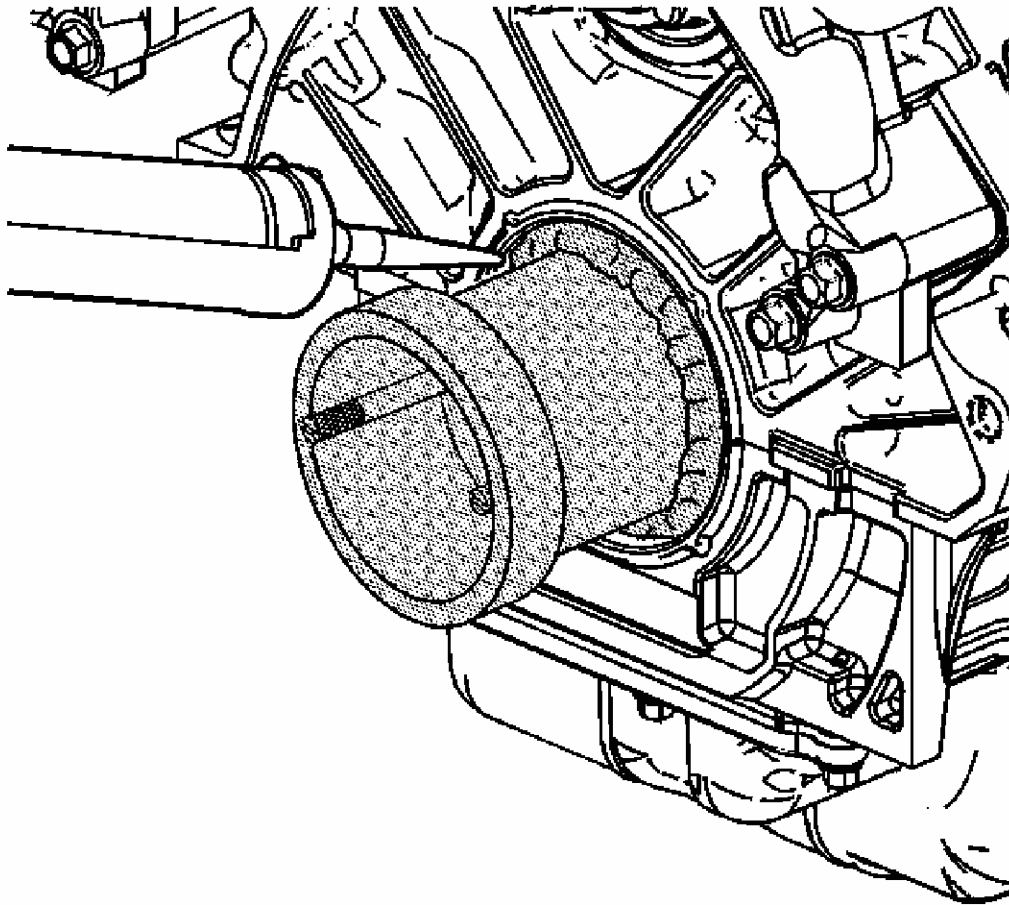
Applying Sealant To Rear Seal Applicator Housing
